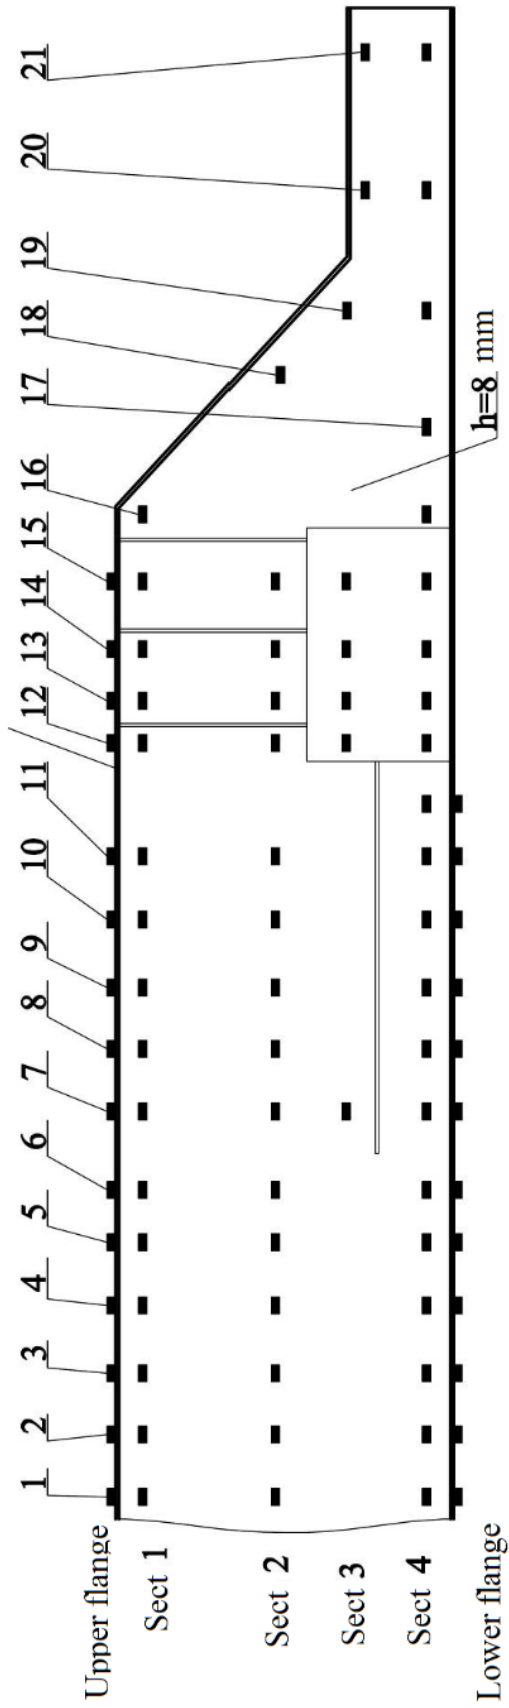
Coercive force measurements for moving out boom head (view from the right)
